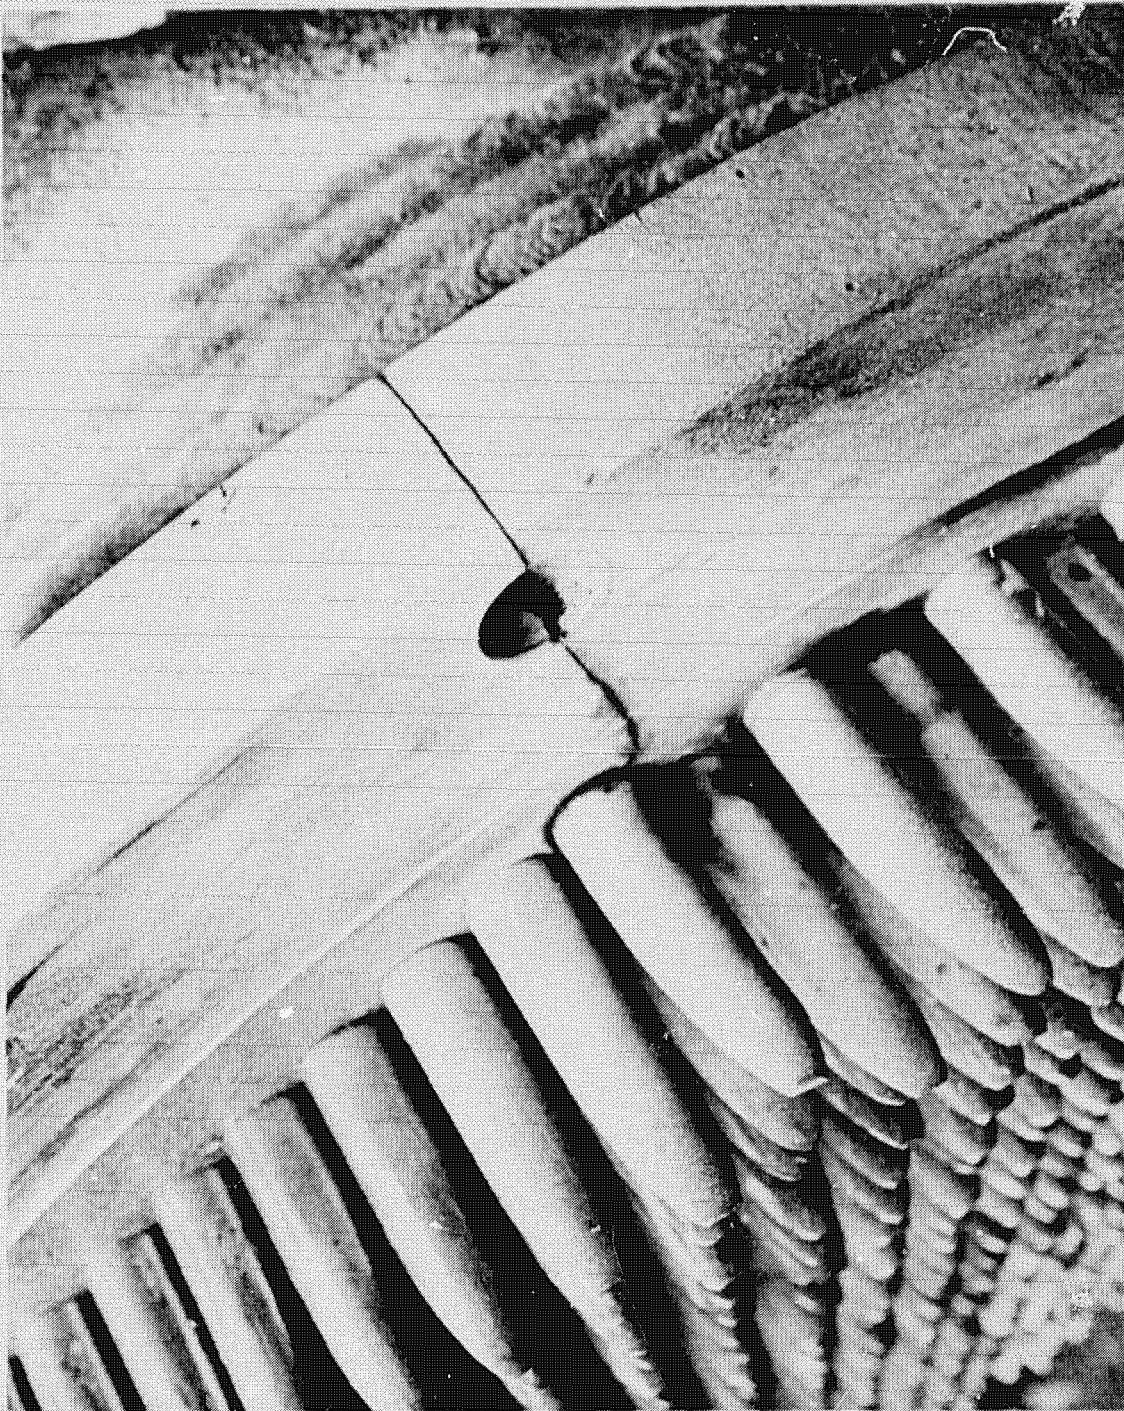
TYPICAL FAILURE IN A HEAT EXCHANGER TUBE SHEET/FLANGE ASSEMBLY
